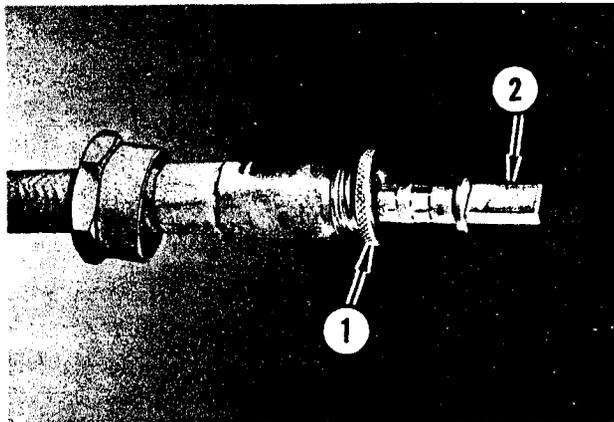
GOVERNOR FLEXIBLE DRIVE
